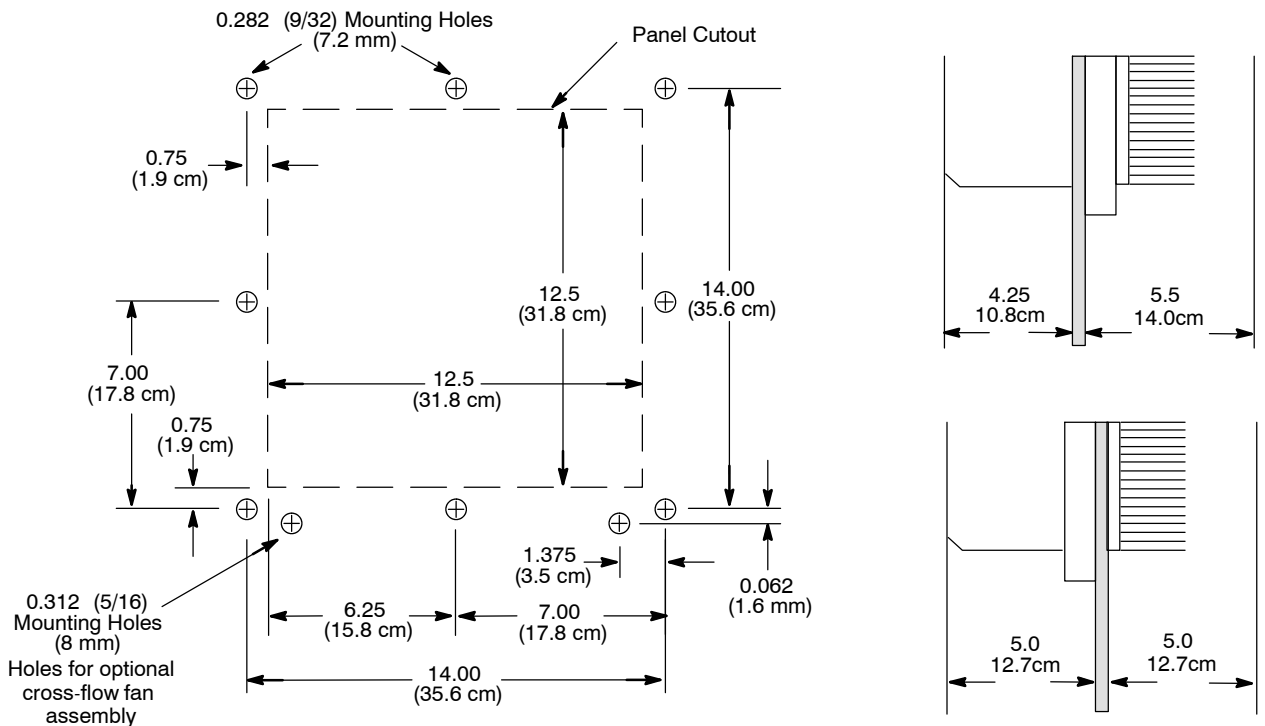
CWM Two-Position Mounting Plate Mounting Dimensions
